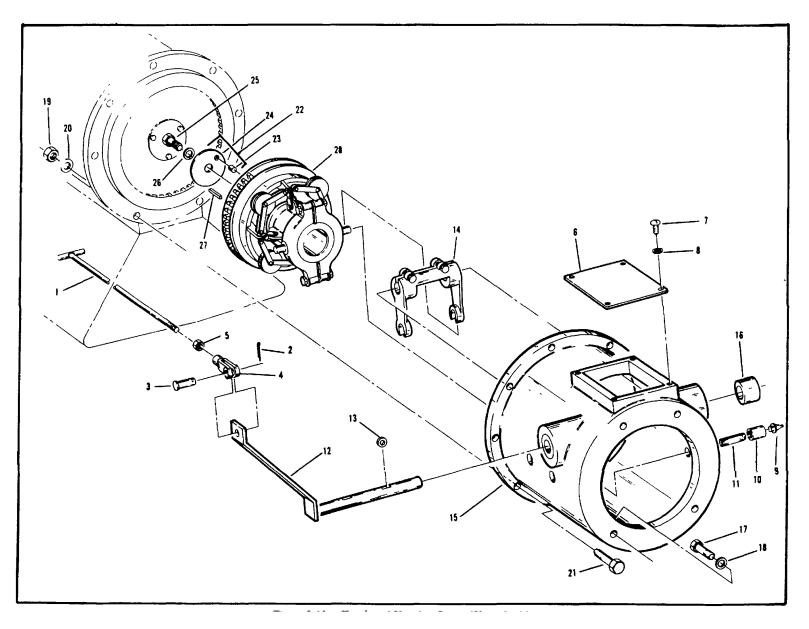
Clutch and Housing Group (Sheet 1 of 2)
